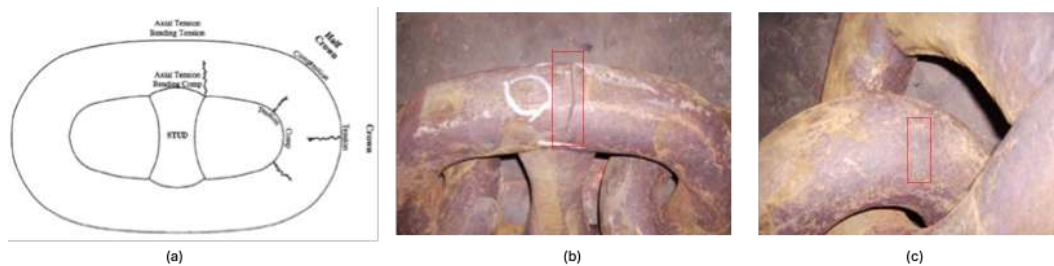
Possible fatigue crack location on studlink chain: (a) Crack at the weld, (c) Fatigue cracks at the crown [17].
